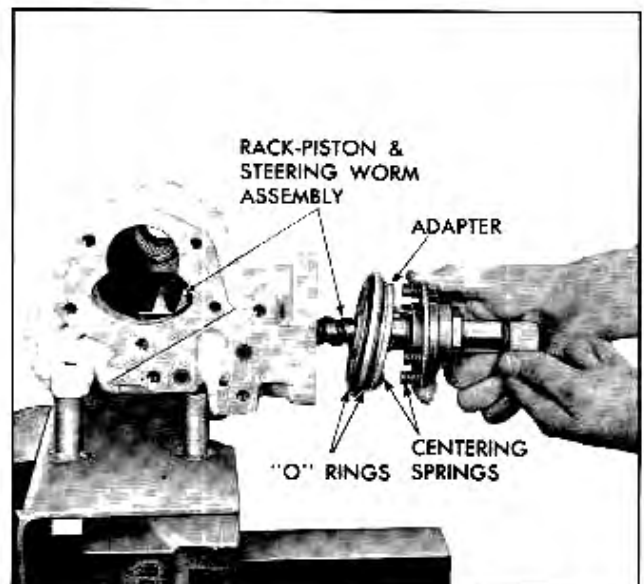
Removing Rack-Piston and Steering Worm Assembly
